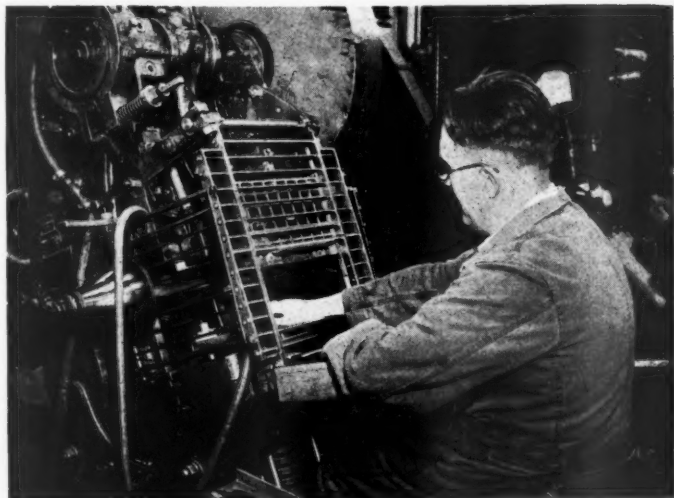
A 12-ton inclinable press fitted with a Mitcham pre-closing, interlocking Guard. Operator is just locating the piece part with his right hand, whilst his left hand holds the next piece part between thumb and forefinger.
